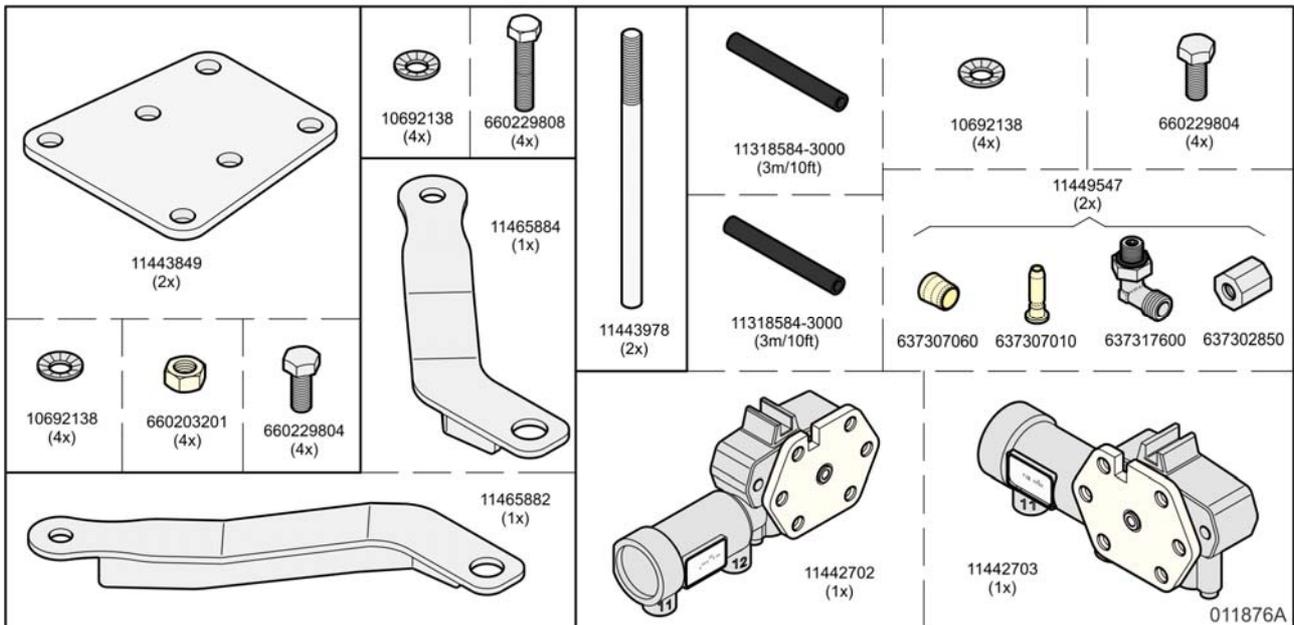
Van Hool kit 11447624 (to modify trailing axle of 8-wheeler)
